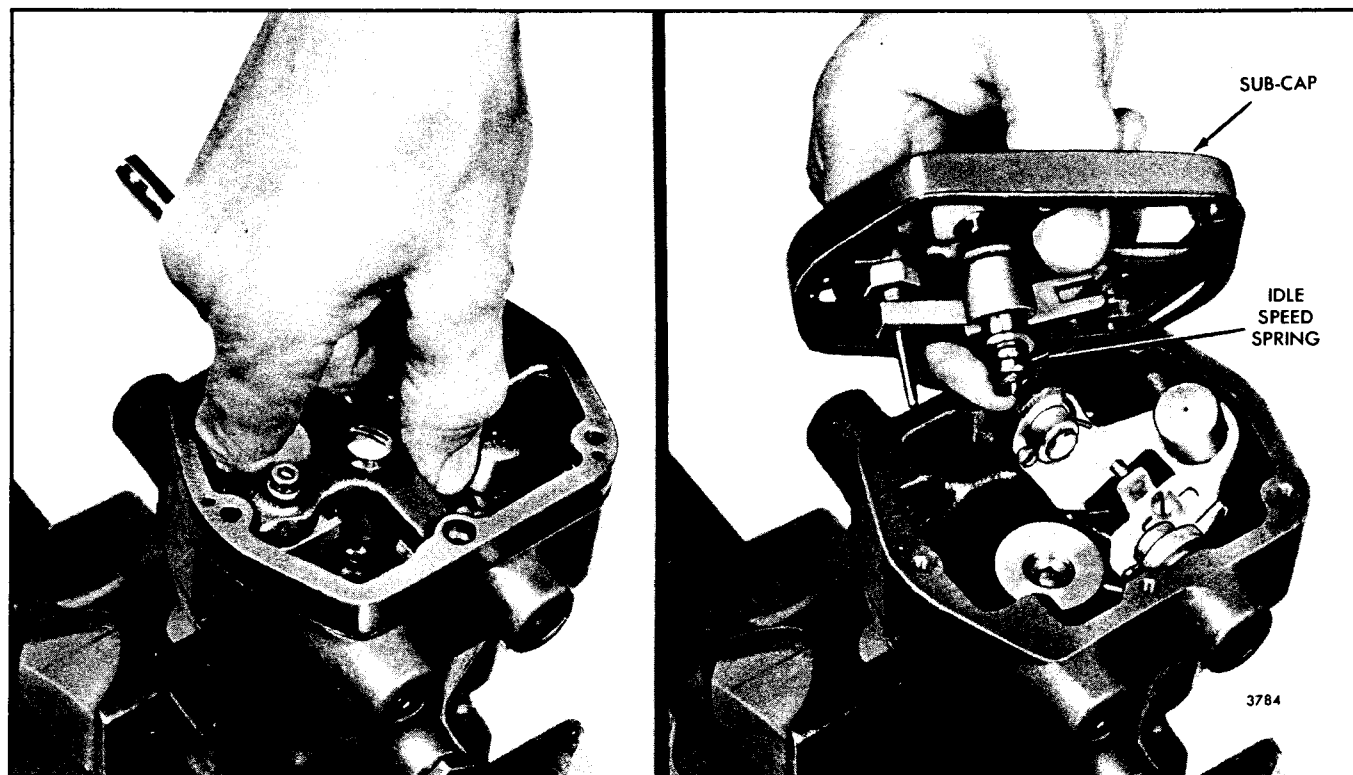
Removing or Installing Governor Sub-Cap Assembly
